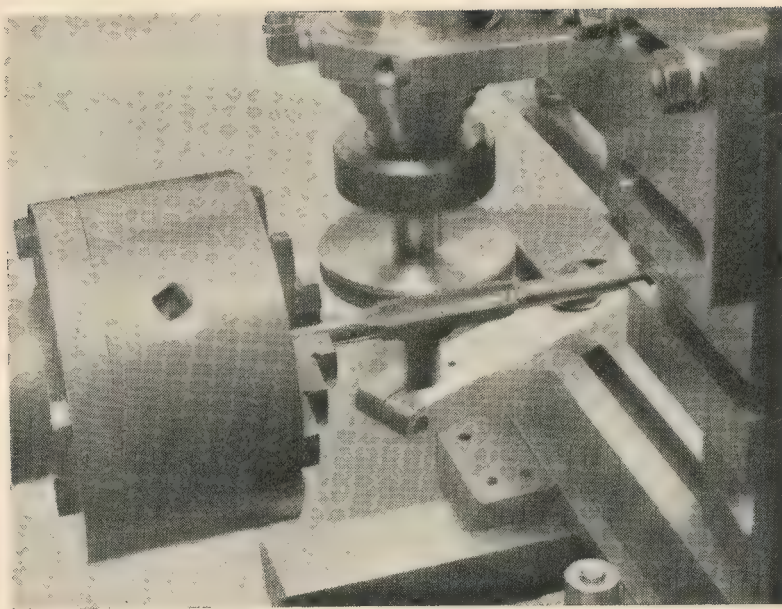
The blank mounted on the spindle of the lathe milling attachment
